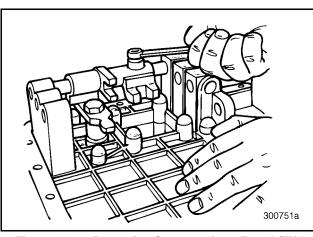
Removing Setscrew from Fourth/Fifth Shifter
